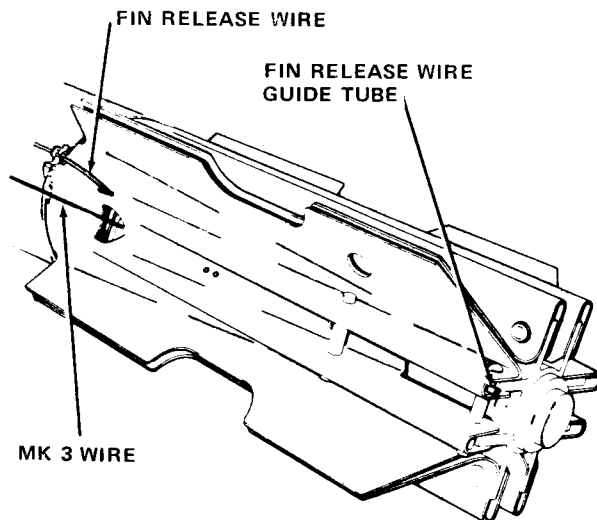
Fin Release Wire Guide Tube Inside Fin MK 15 Mod 2
